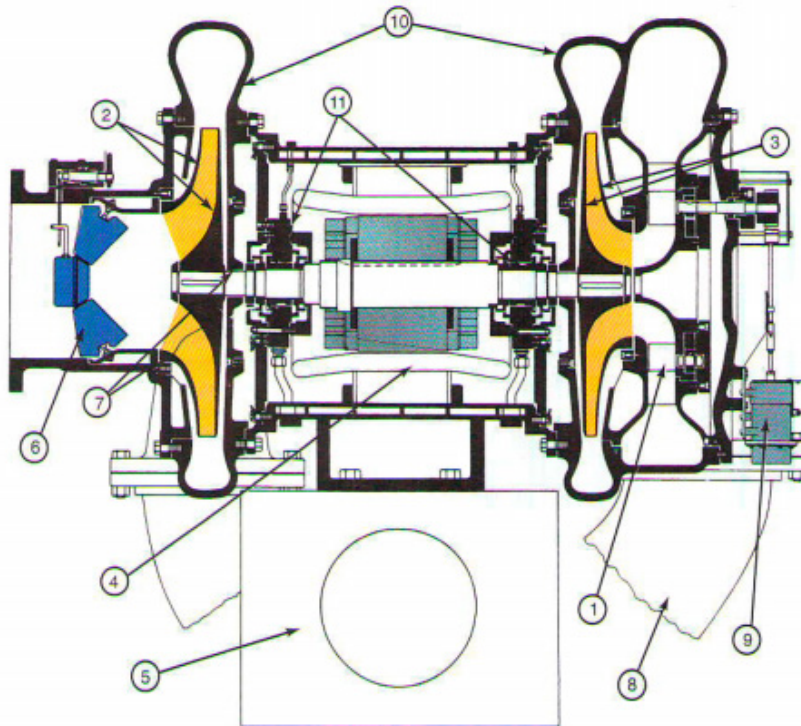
Two-stage centrifugal compressor. 1—Second-stage variable inlet guide vane. 2—First-stage impeller. 3—Second-stage impeller. 4—Water-cooled motor. 5—Base, oil tank, and lubricating oil pump assembly. 6—First-stage guide vanes and capacity control. 7—Labyrinth seal. 8—Cross-over connection. 9—Guide vane actuator. 10—Volute casing. 11—Pressure-lubricated sleeve bearing. Note that discharge opening is not shown.
